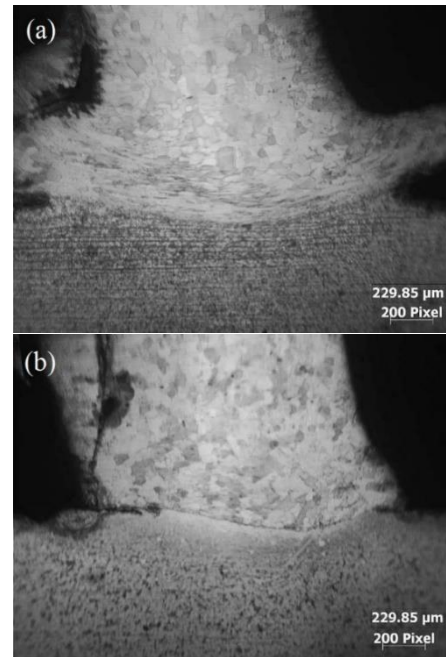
The microstructure of A213T22(2¼ Cr-1 Mo) Seamless Tube to A240TP409 ferritic finned (a) Accepted specimen: 100 % weld bond (b) Rejected specimen: 81 % weld bond
